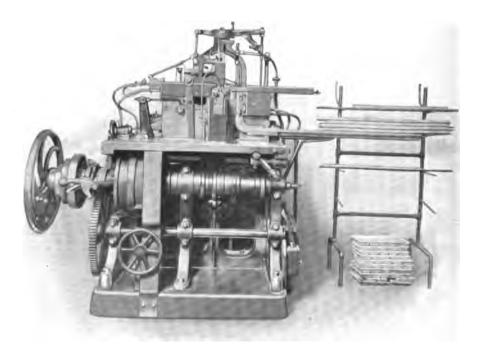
Automatic typecasting machine; American Type Founders Co. To face page 309.] of ordinary printers' type from a single mould, which is water-cooled and constructed somewhat on the lines of the Monotype mould. It delivers its type in a continuous line, and is capable of producing over 10,000 10-point type per hour, a slightly slower speed being maintained in the case of 12-point, and the rapidity of production of the smaller sizes is of course proportionately increased. These machines deliver their type from the mould completely finished without using any form of knife, file, dressingplane, or milling-cutter.
